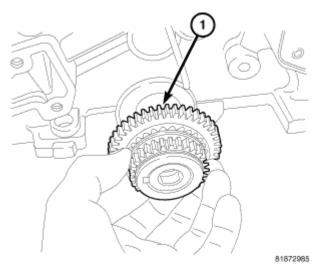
CRANKSHAFT SPROCKET Courtesy of CHRYSLER LLC
